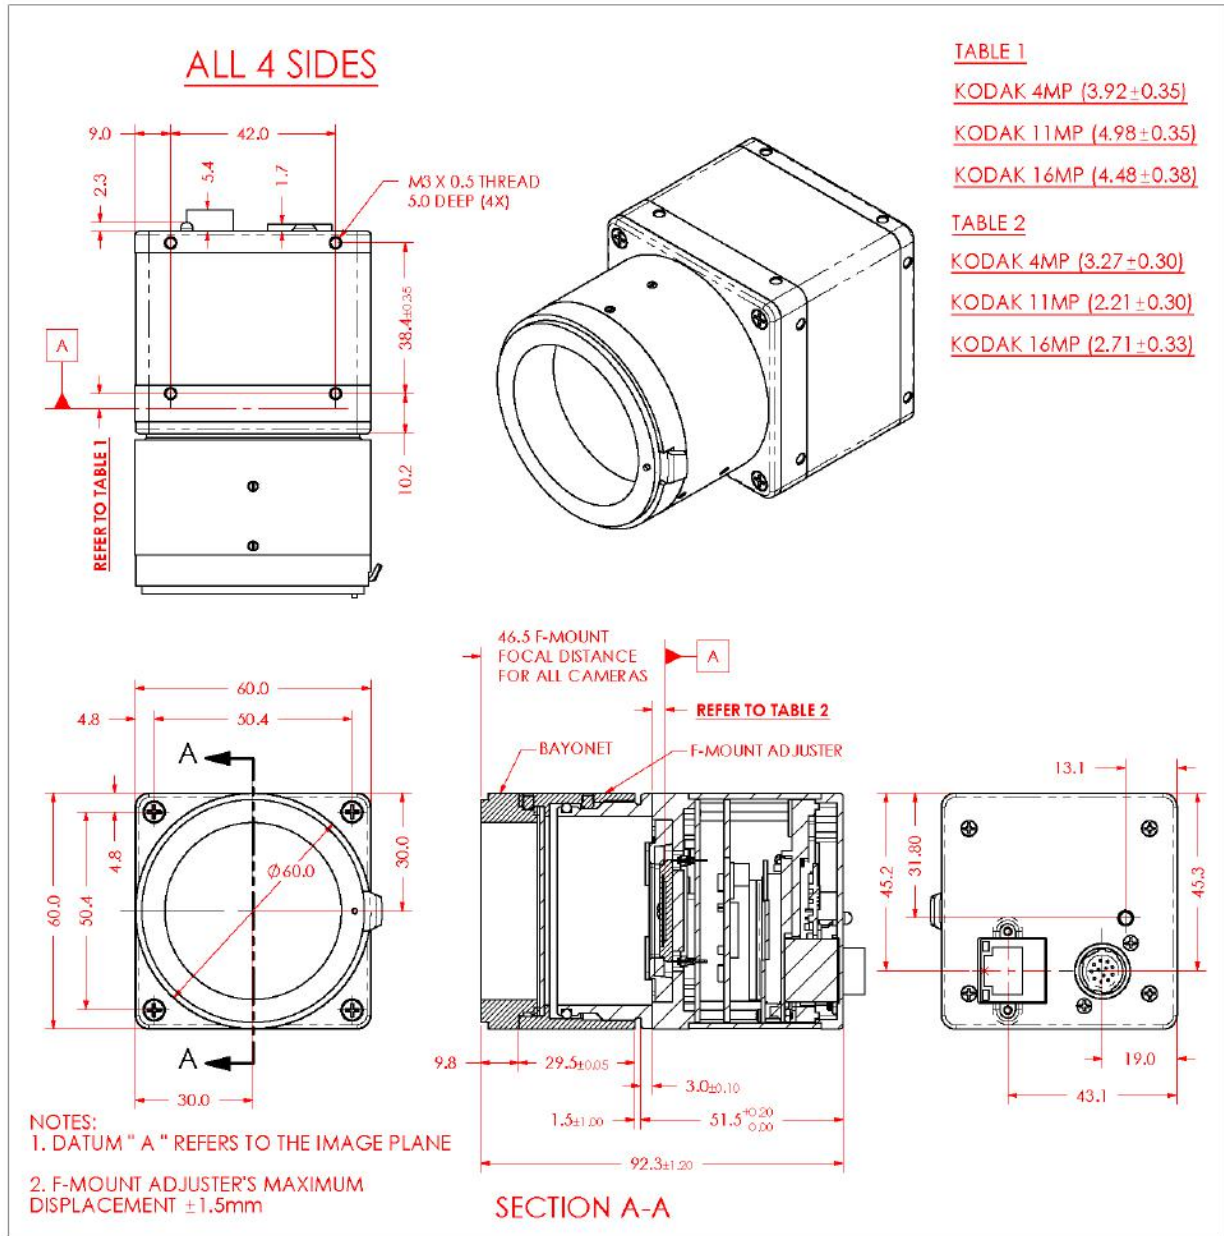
F-mount GigE vision output – dimensional drawings for IGV-B2020, IGV-B4020 and IGV-B4820.
